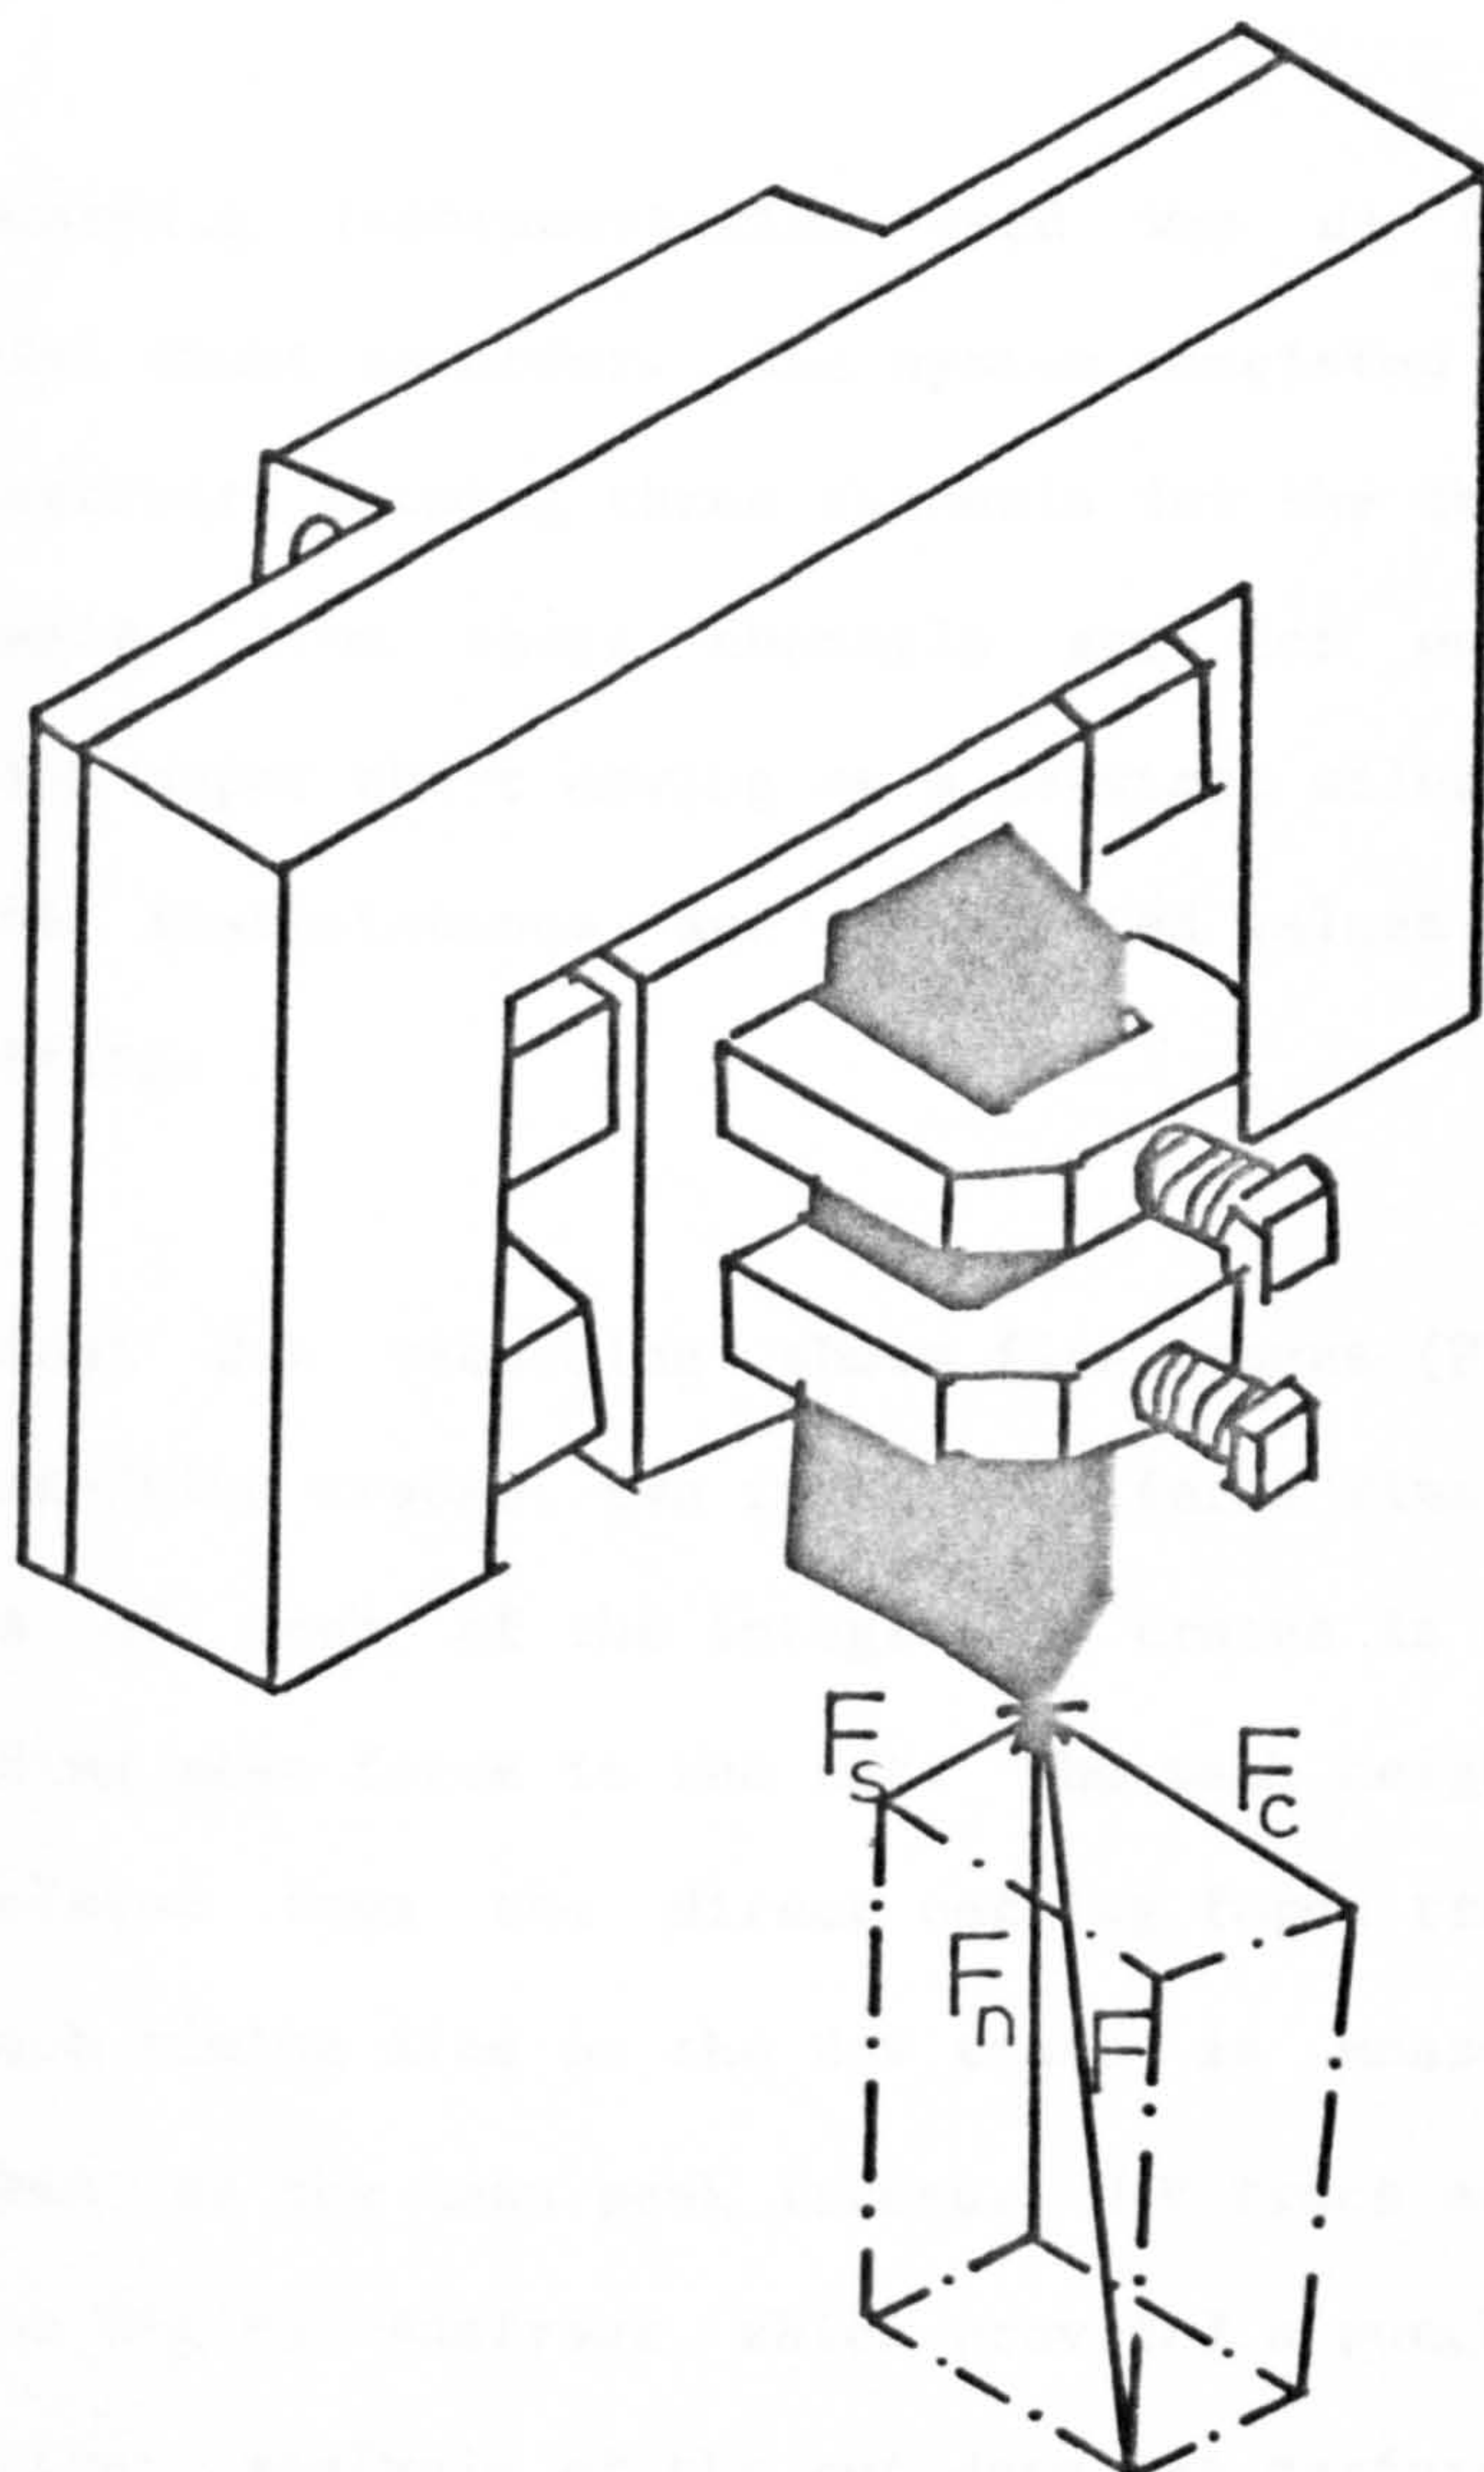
CUTTING TOOL DYNAMOMETER
